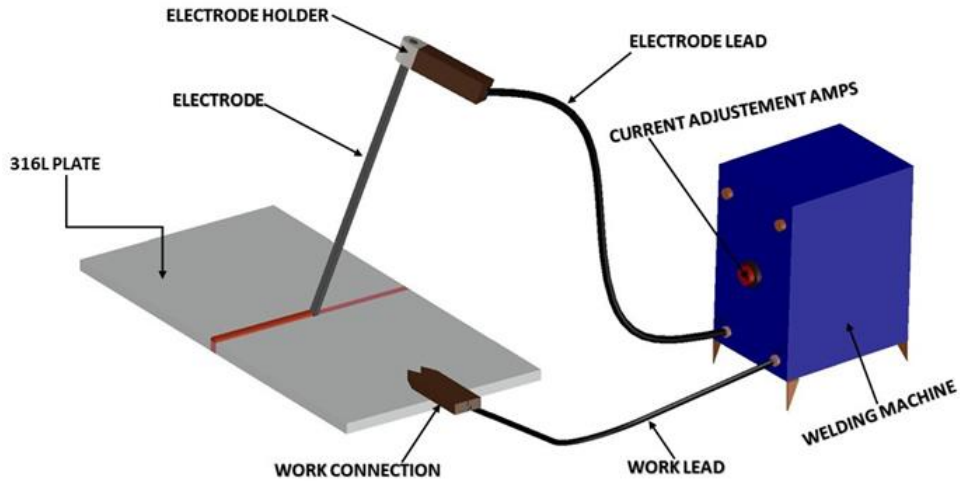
Schematic of SMAW Welding Techniques.
